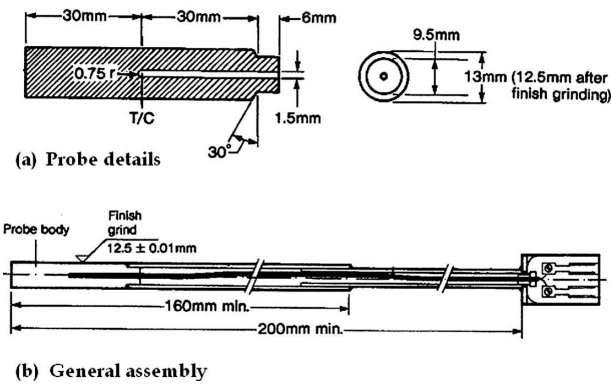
The standardized Inconel 600 cylindrical probe used for testing different kinds of quenchants: (a) probe details; (b) general assembly [23–25].
